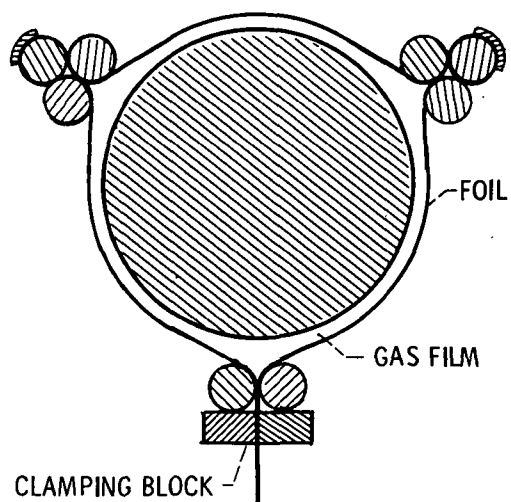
Continuous Ribbon-Foil Journal Bearing.
